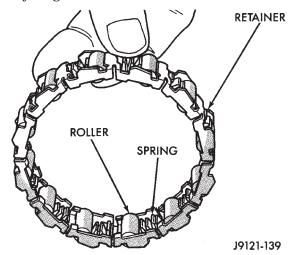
Overrunning Clutch Rollers, Springs, Retainer
